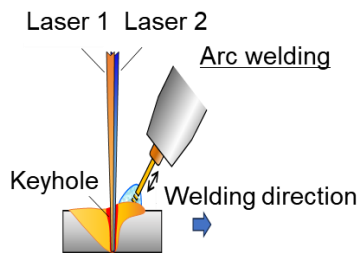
Adoption of Twin-Spot Laser Welding
